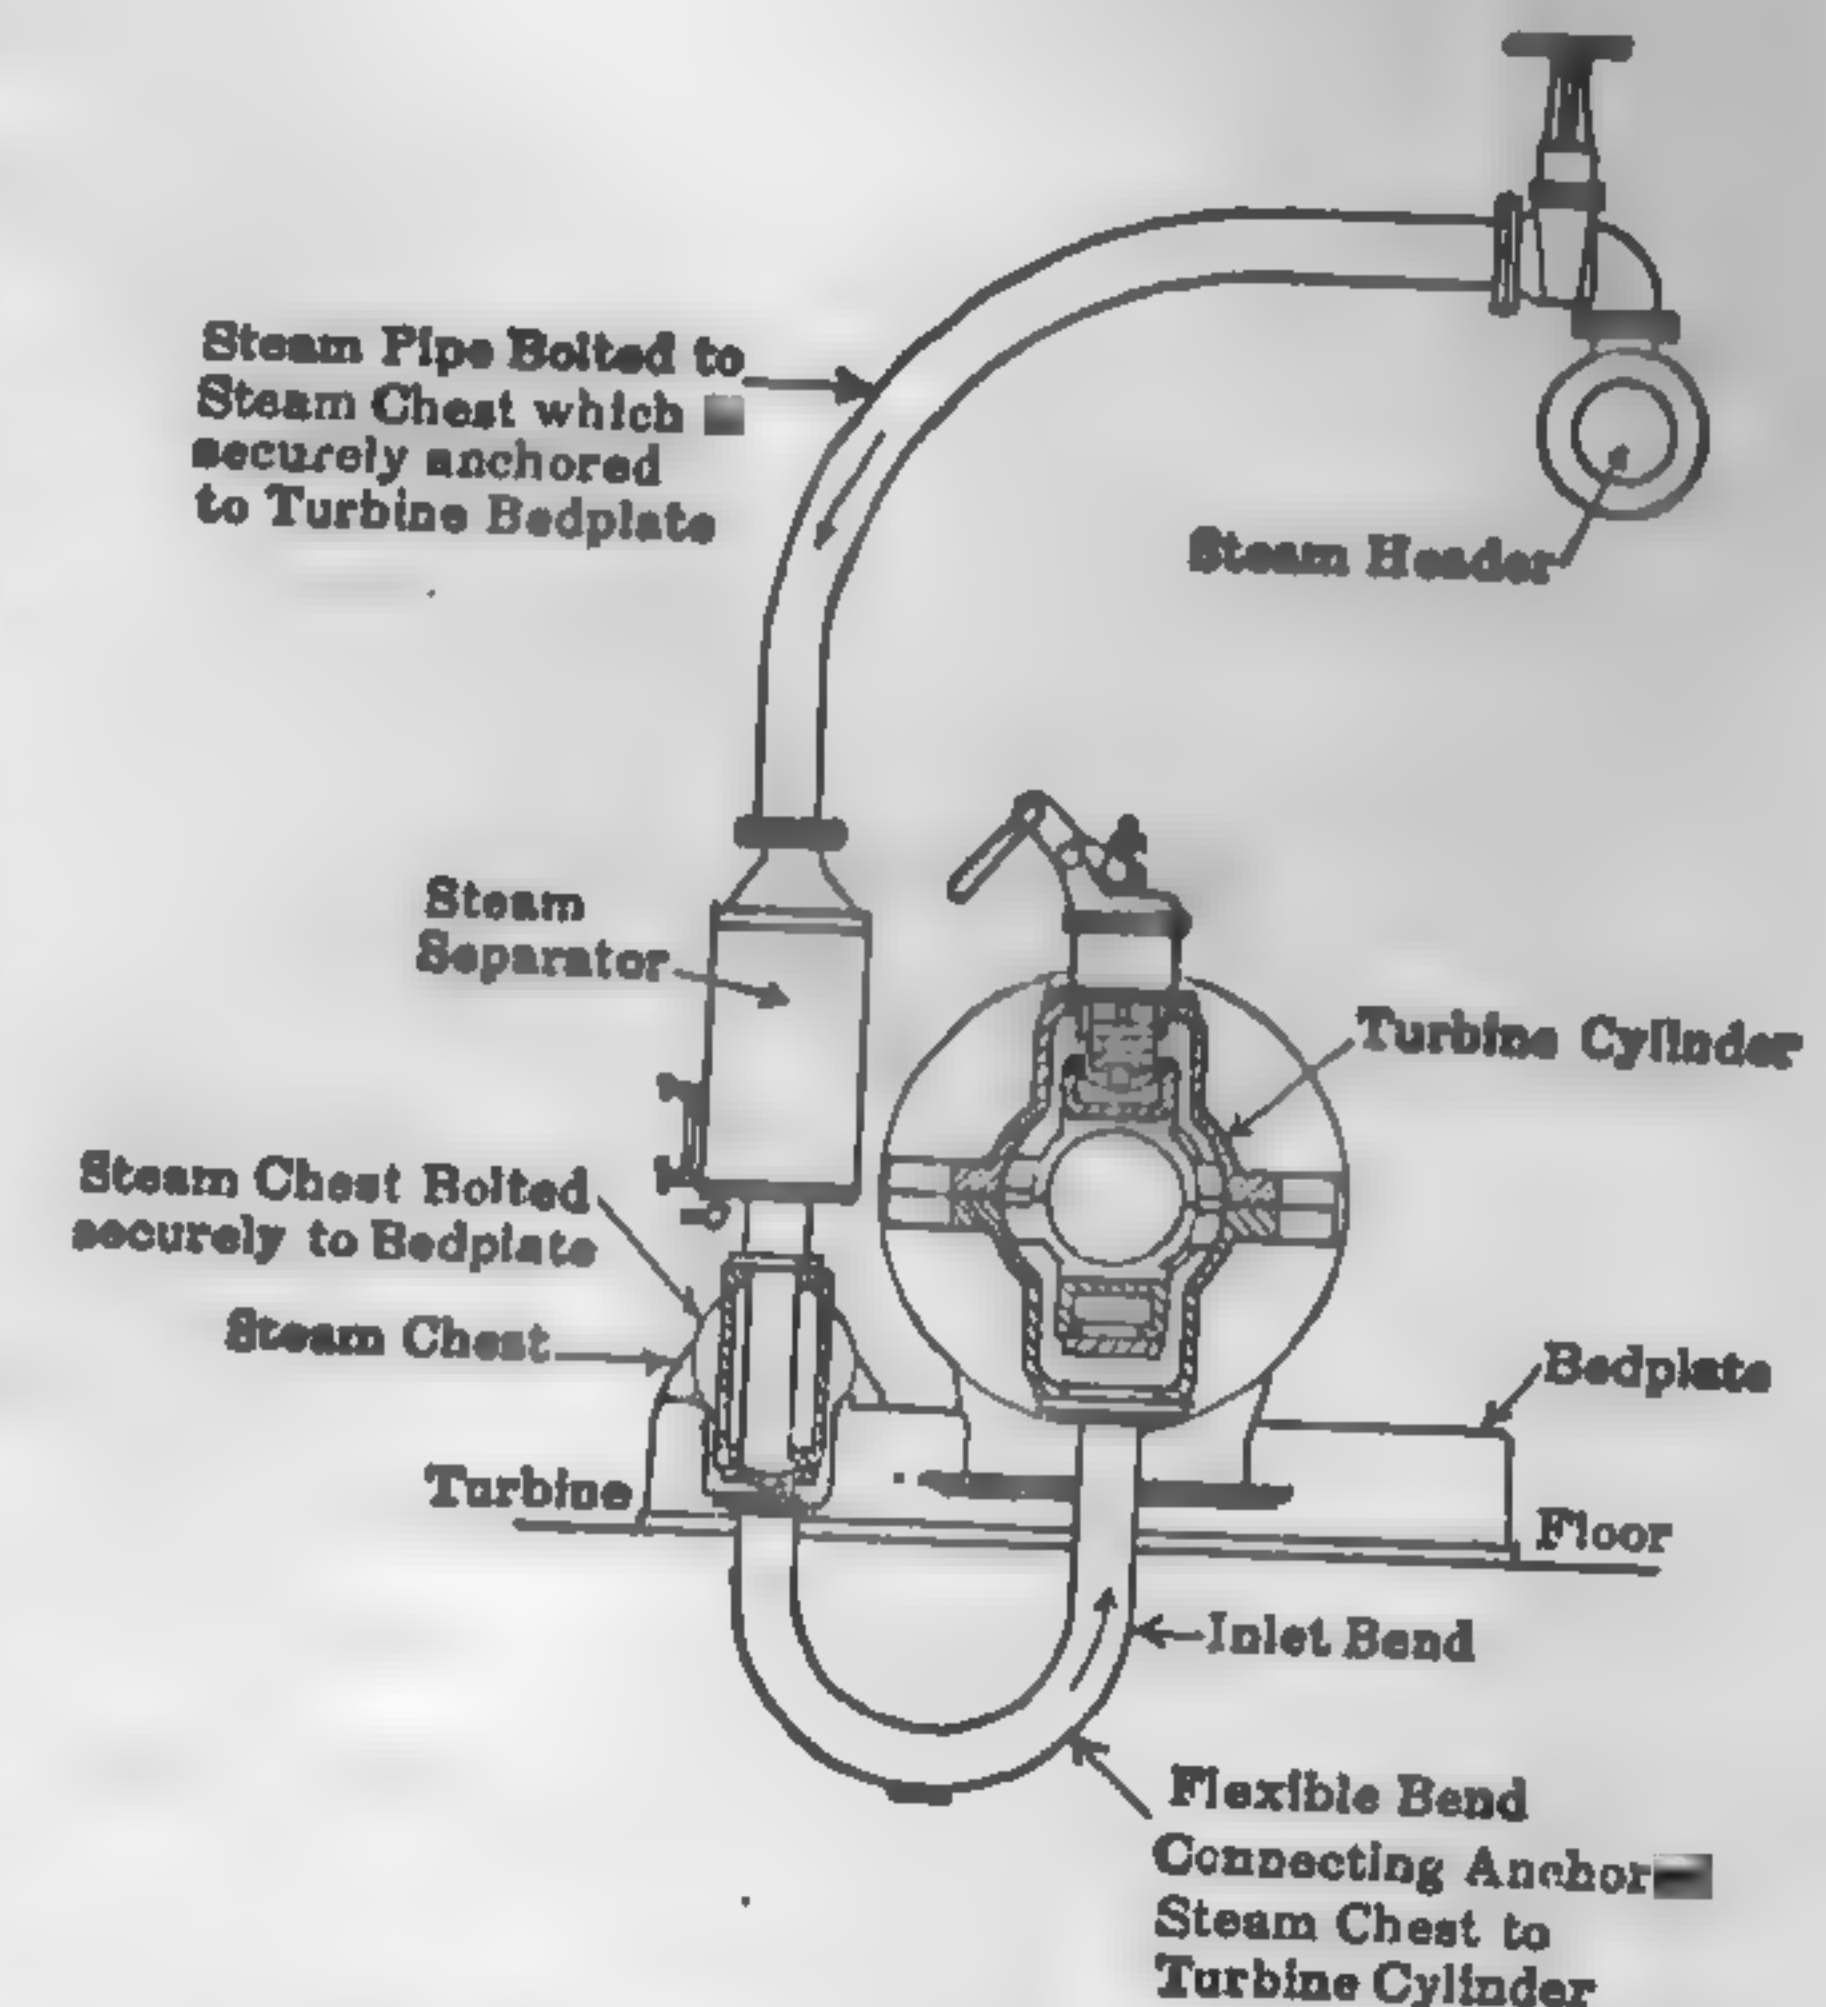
Separator Applied to Steam Turbine — Overhead Steam Main.
